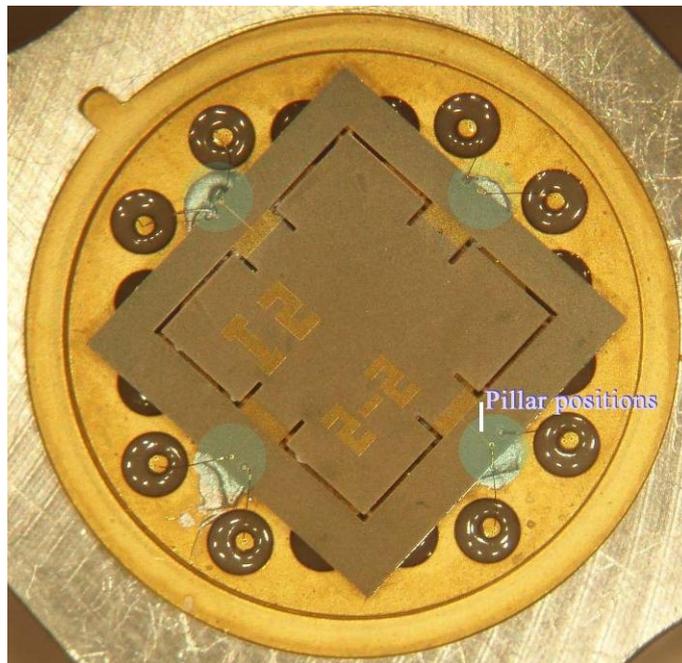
Insensor accelerometer mounted and wire bonded in a TO-8 canister
